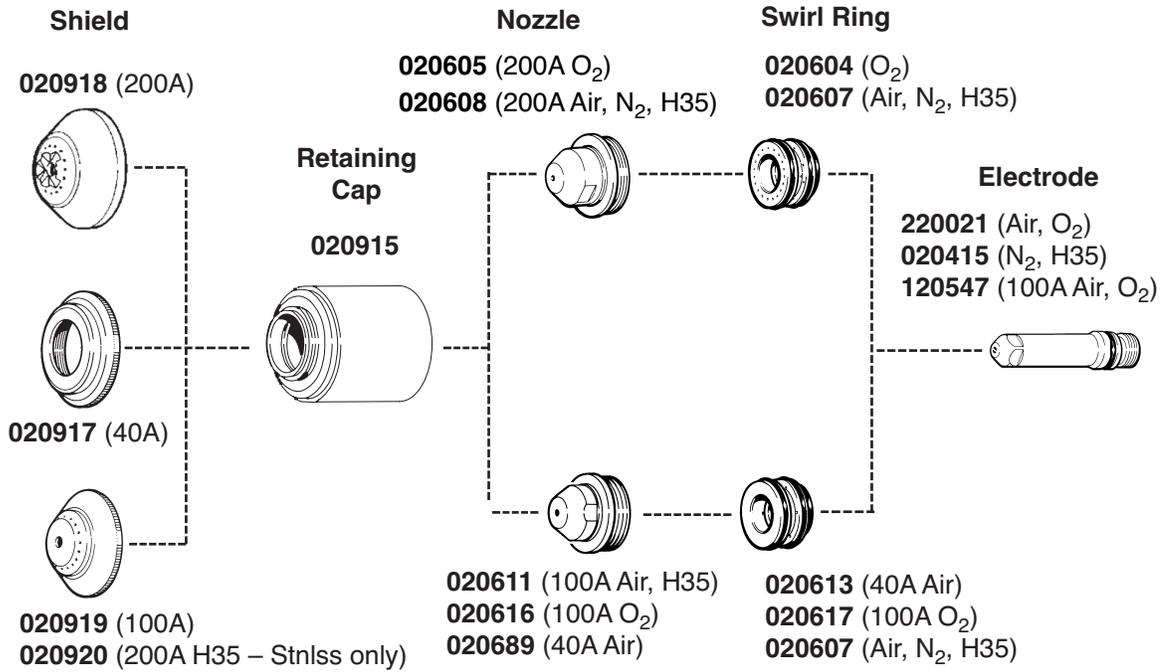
PAC200T (Cutting) Trigger Torch Consumable Parts
